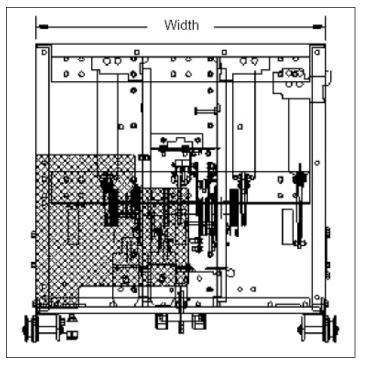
Typical circuit breaker front view with CloSure tool attached (approximate mechanism chassis width).
